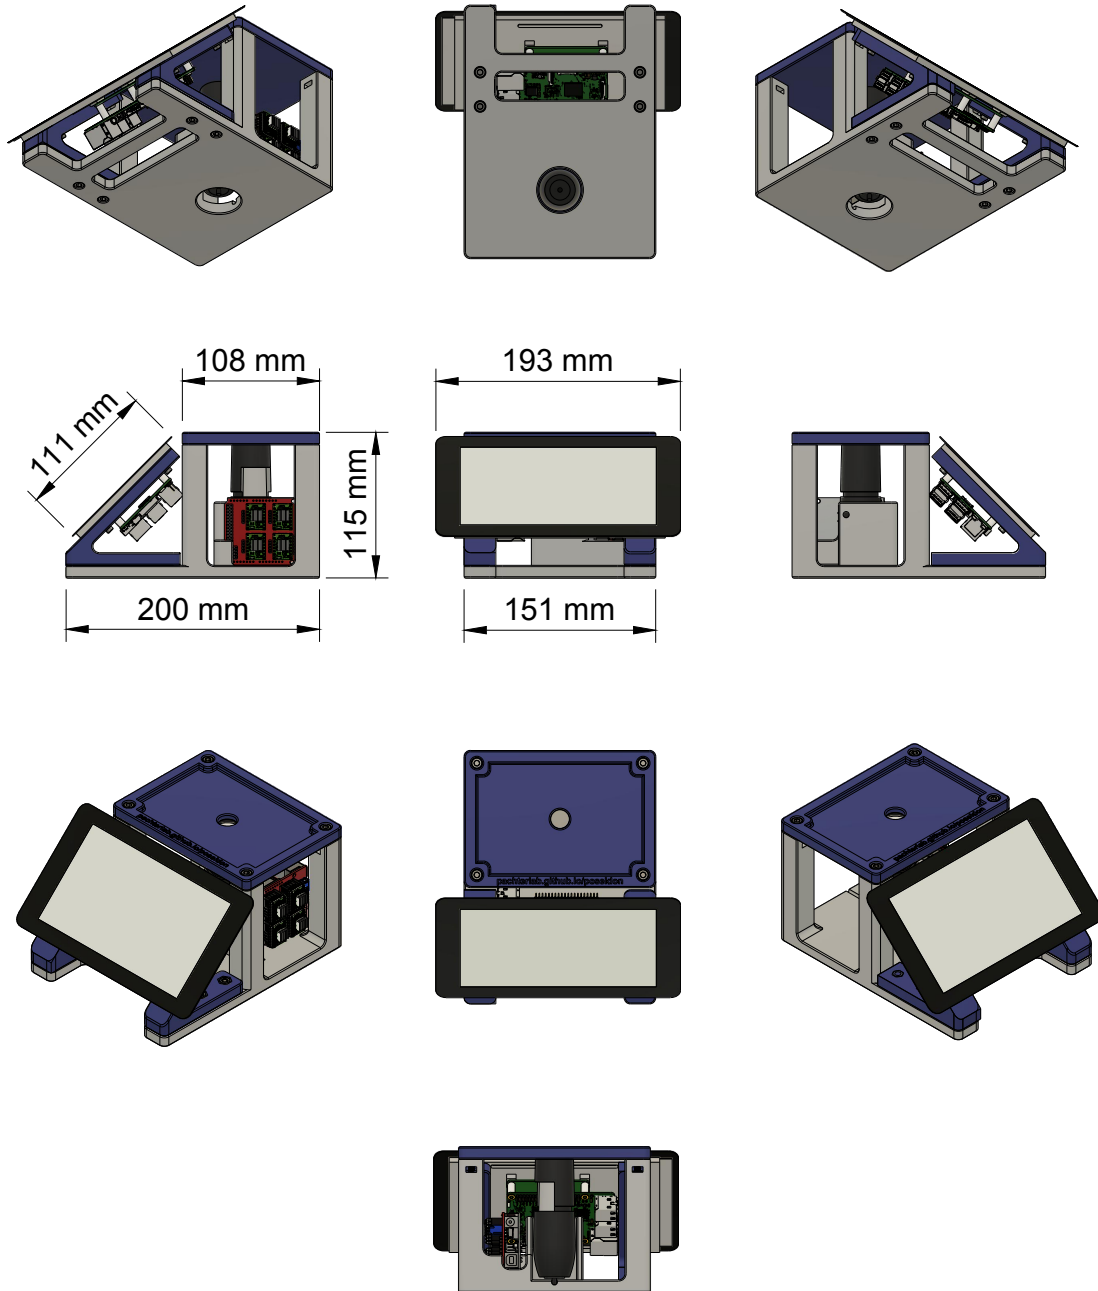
CAD renderings of the poseidon microscope. Multiple views and major dimensions are shown.
